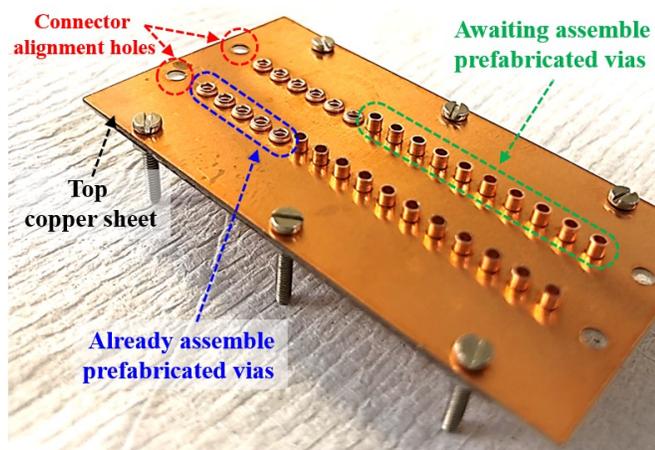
Fabricated HSIW with prefabricated vias inserted through the via holes.
